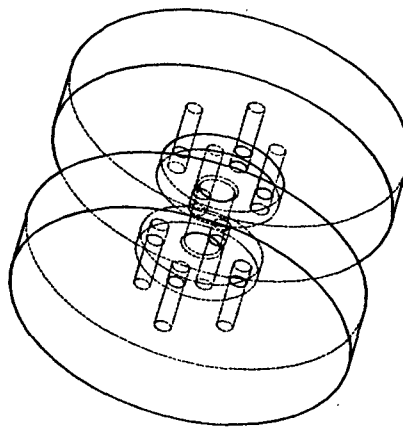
Alignment mechanism designed to compensate for the non-parallelism of sample faces.
